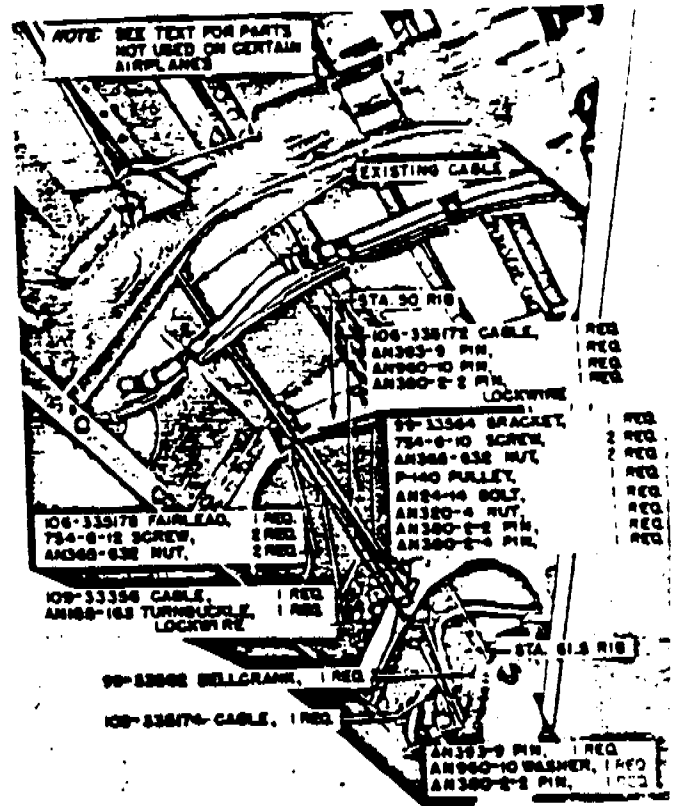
Cables and Attaching Parts - Right Wheel Well
